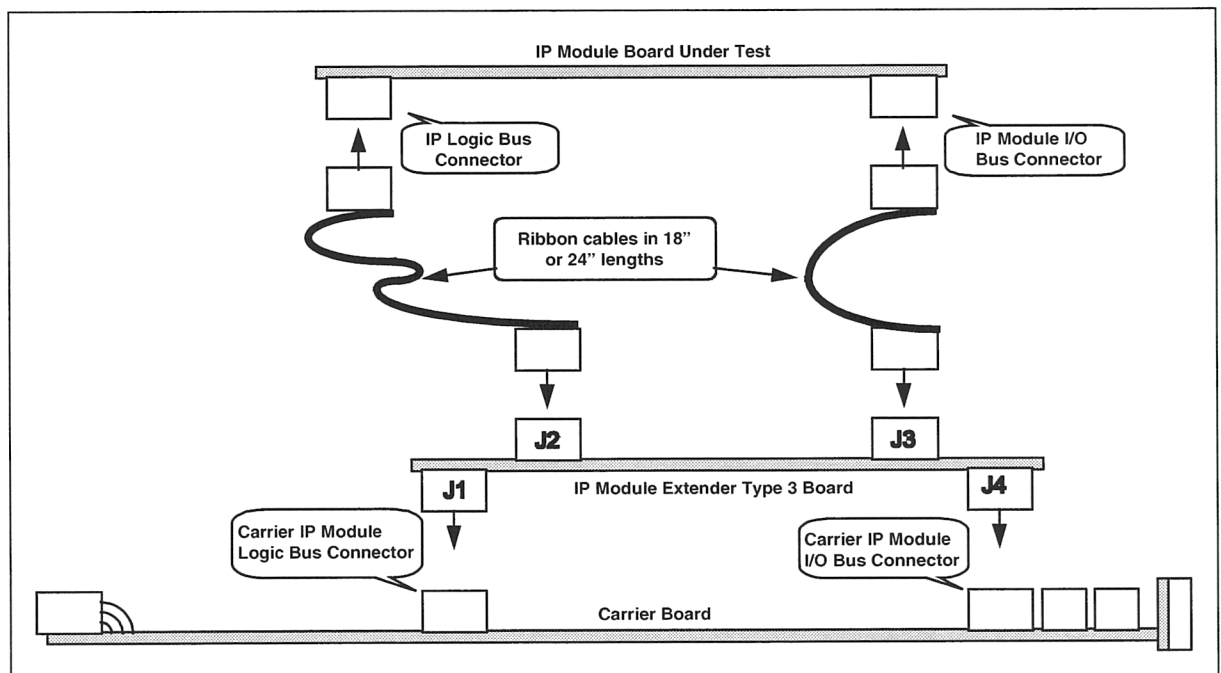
IPBE3 Assembly Diagram on an IP Carrier Board
